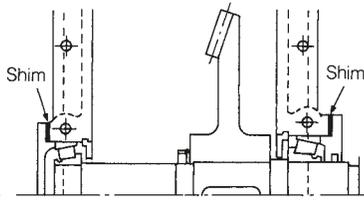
DF Arrangement With Clearance Adjusted by Outer Rings.
